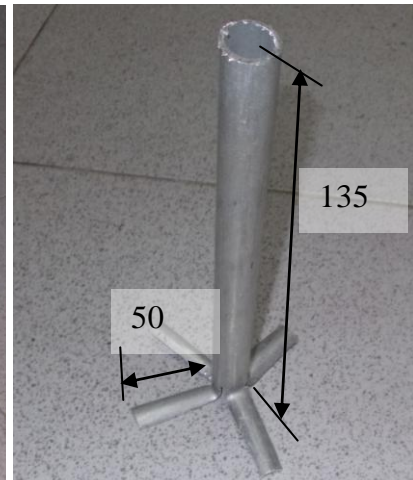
Axis tube. Fig shows an aluminium, but tube steel tube is appropriate option, better option is inox stainless with similar outside diameter. The total length of the tube is around 185 mm. Tube is cut to make 4 bended legs as illustrated.
